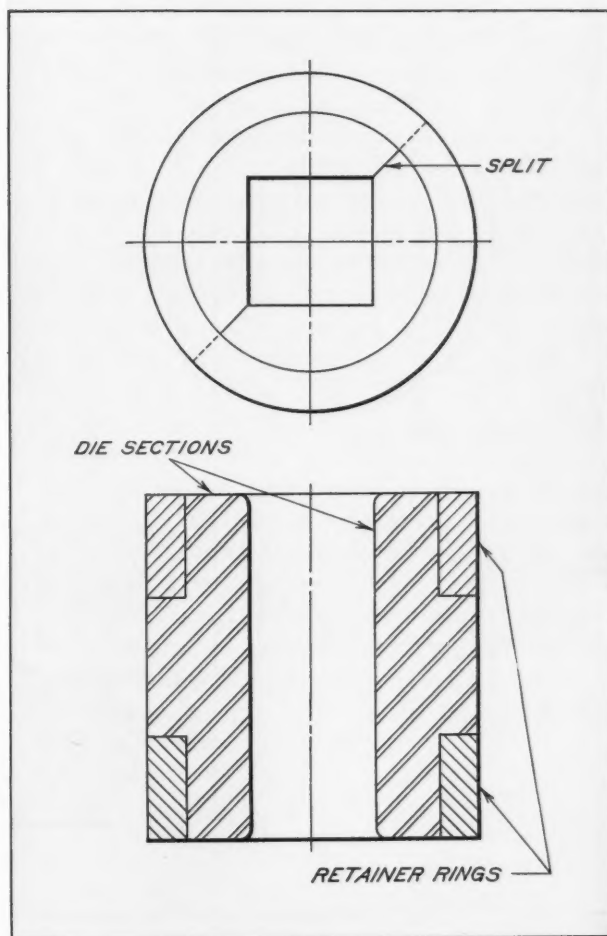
Dies for producing square, rectangular, or irregular-shaped powdered-metal parts can often be made advantageously by splitting them and securely clamping the split halves as shown
